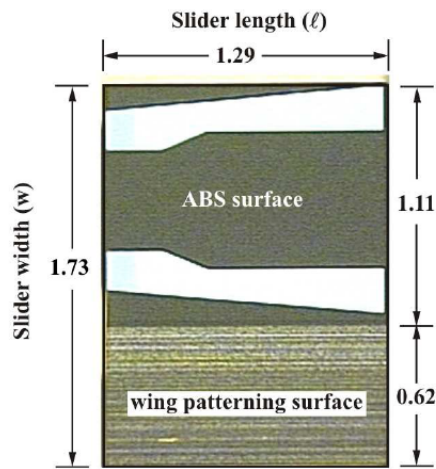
Showing dimension, ABS surface and wing patterning surface.
